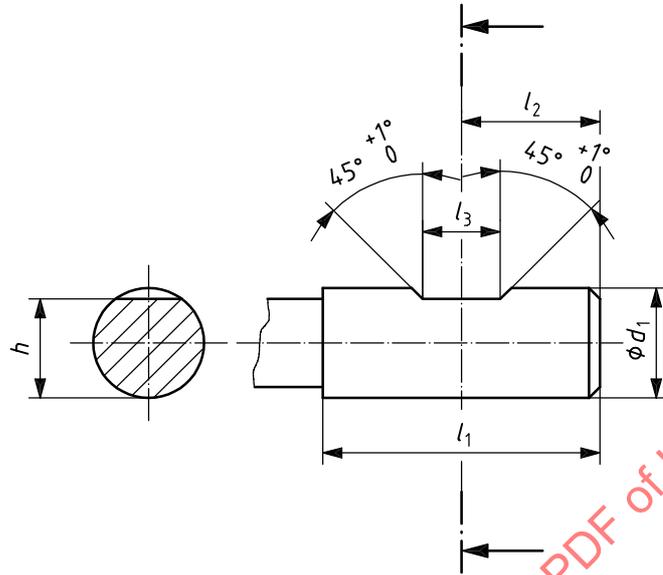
WE form — Flatted cylindrical shanks with single flat
